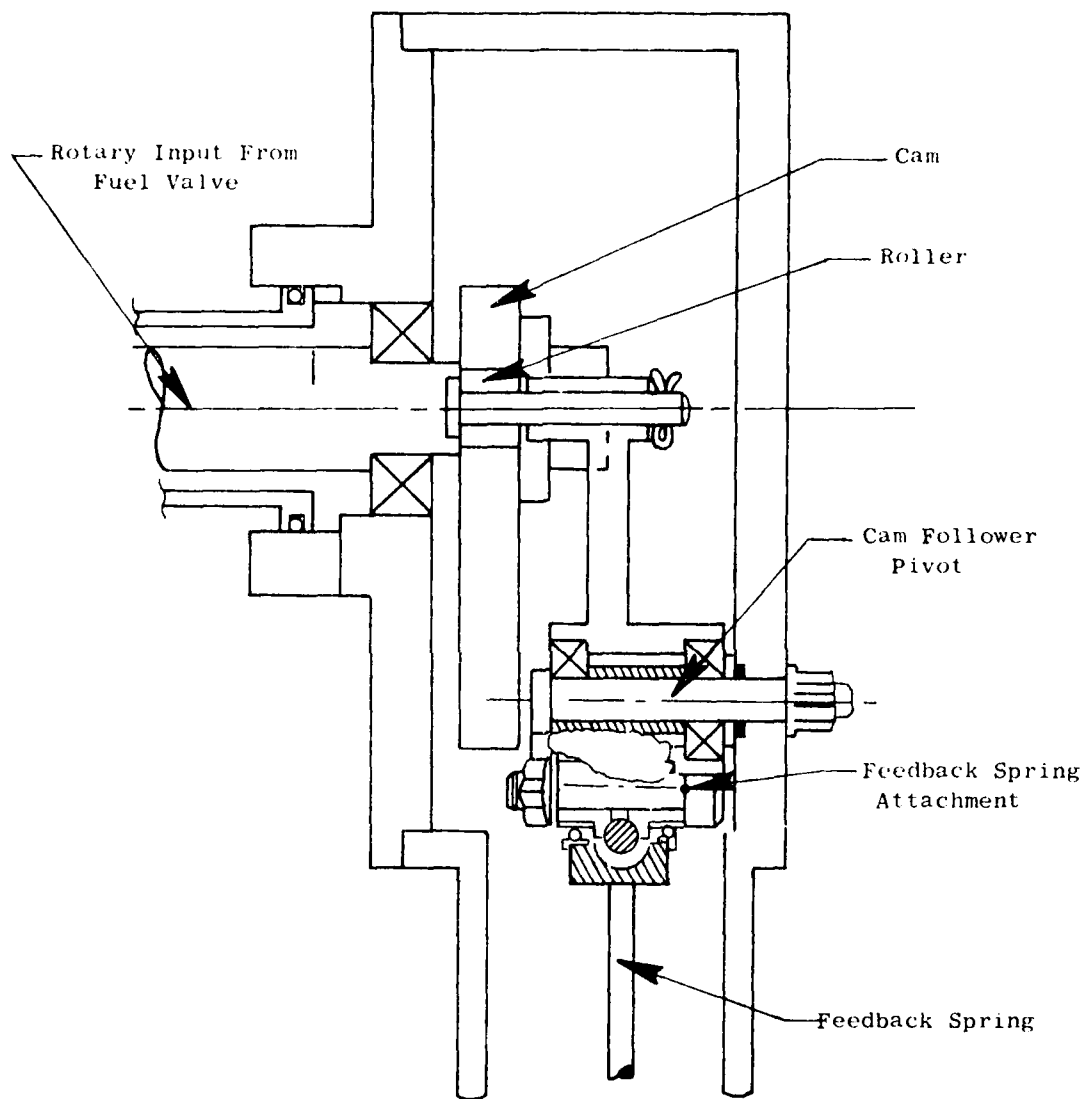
Metering Valve Position Feedback Mechanism at the Computer.
